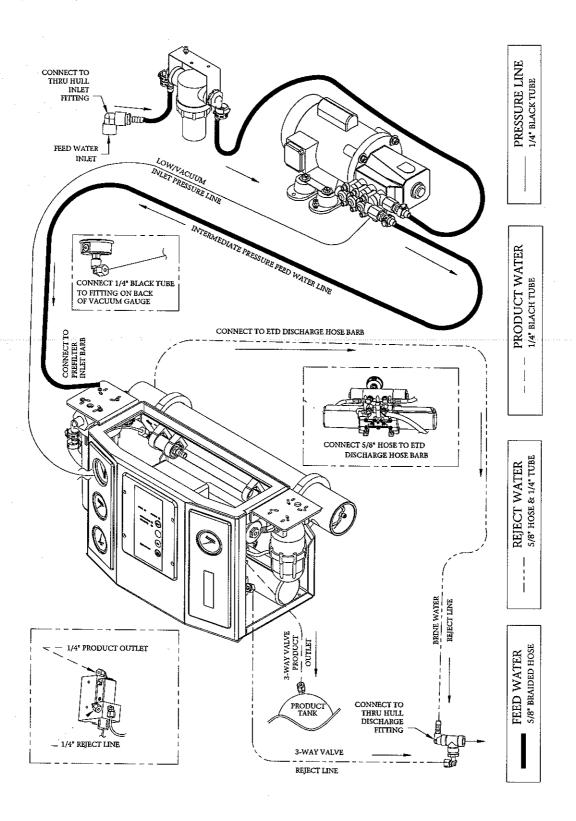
Use the flow arrows on this figure and to check the Ultra Whisper Compact installation.
